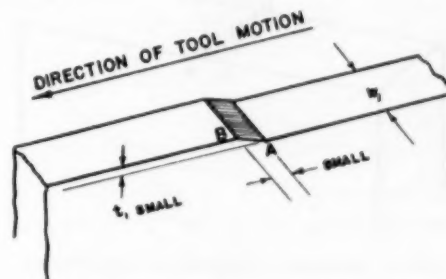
HEAT SOURCE MOVING ON WORKPIECE
